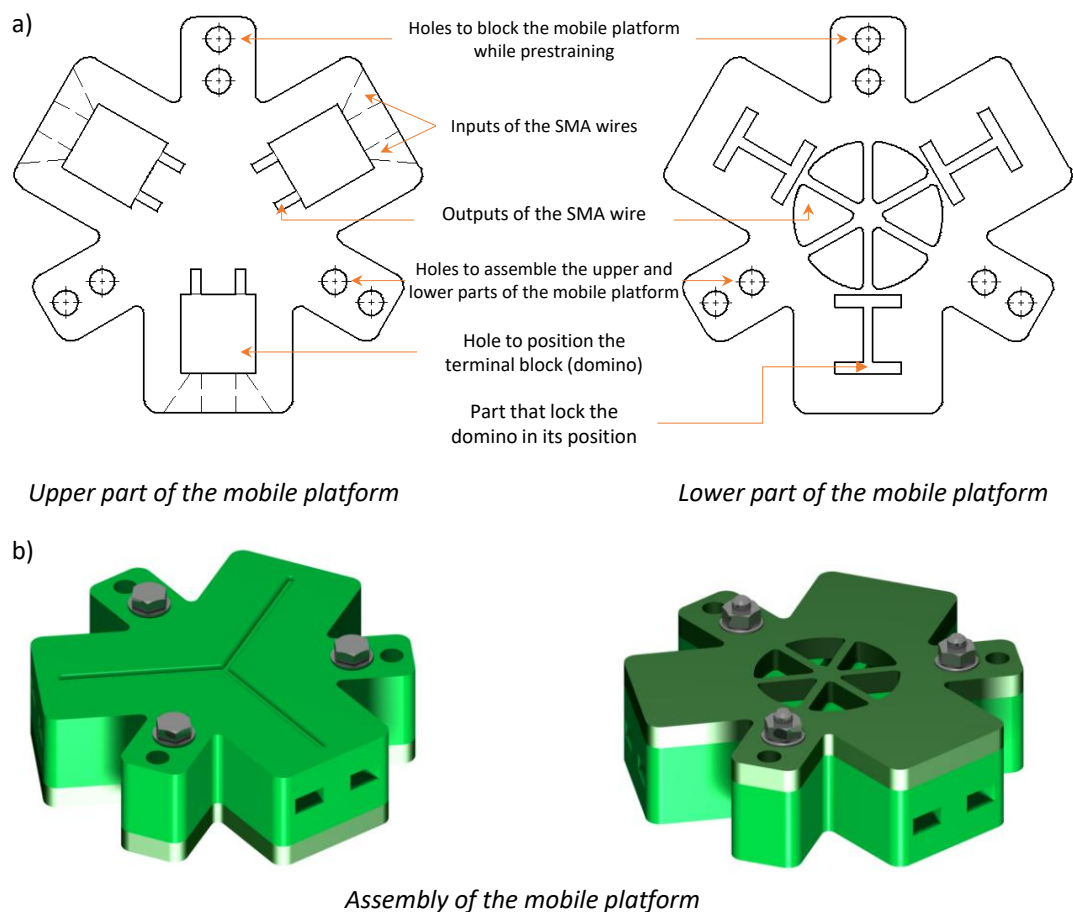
Details of the mobile platform. (a) Functionality of the details of the mobile platform. (b) Isometric views of the CAD assembly of the mobile platform.
